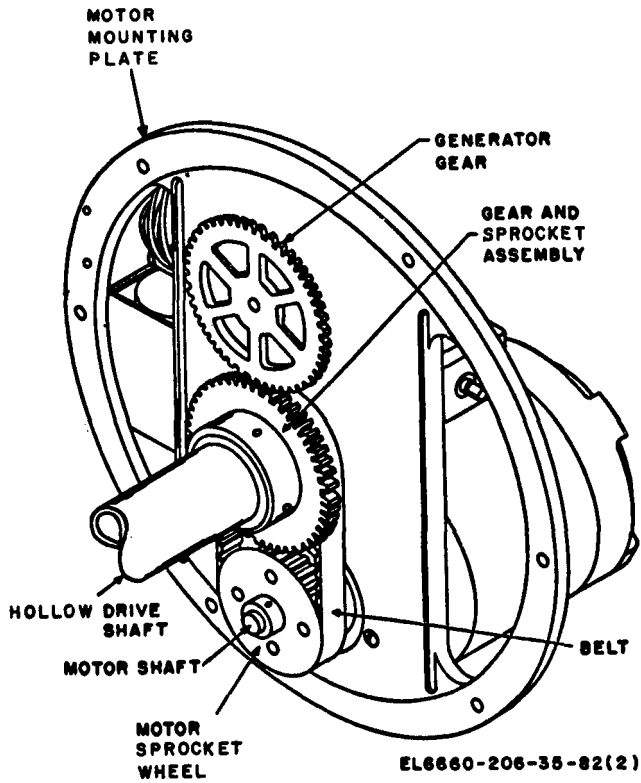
(2). Antenna scanner assembly, disassembly and reassembly (sheet 2 of 5).
